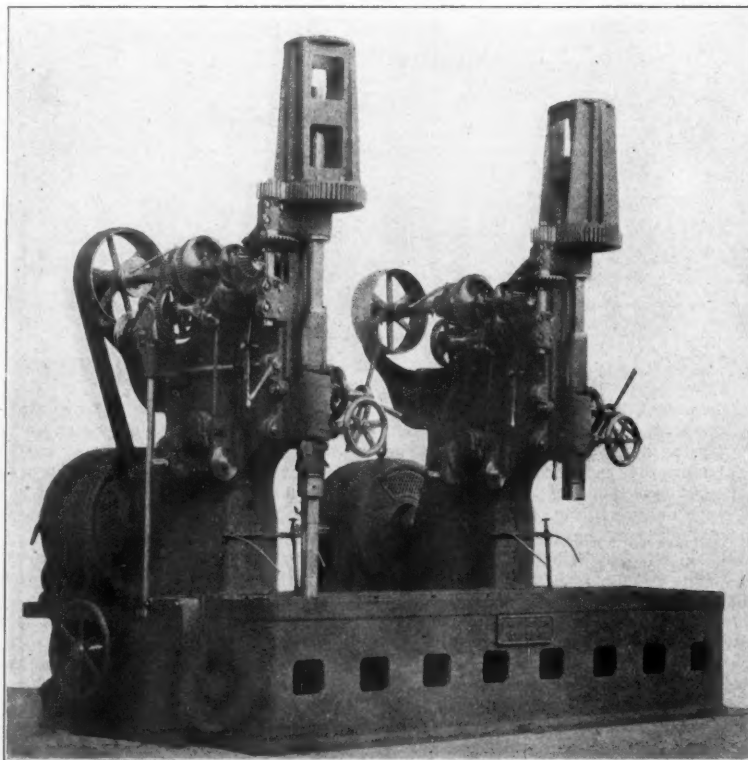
The Baker Bros. Double Spindle Boring Machine.
